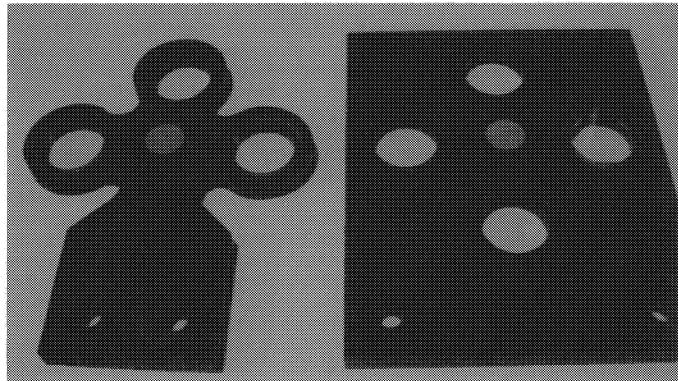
Test Fixtures # 3 & 4; Counterbore recessed
